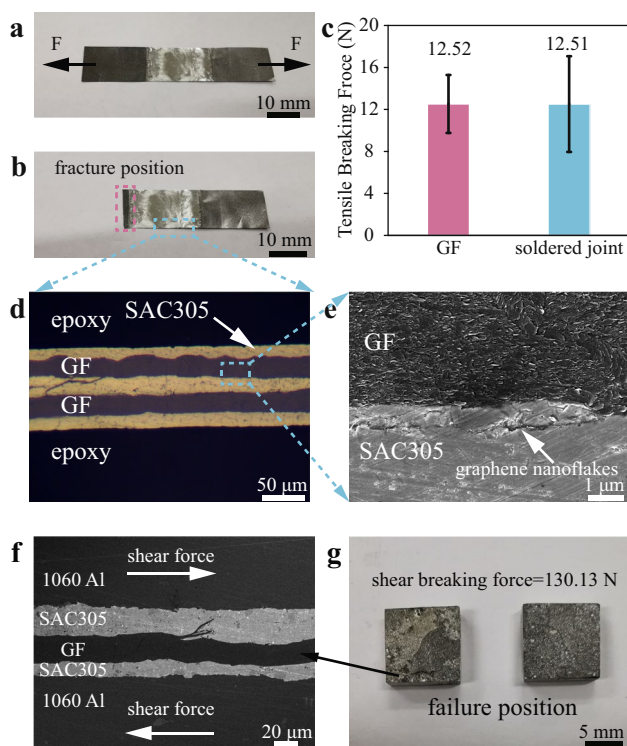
Mechanical performance tests. a Photograph of a typical GF-soldered joint. b Photograph of the failed GF-soldered joint after tensile test. c Comparisons of average tensile breaking force between GFs and GF-soldered joints. d, e Cross-sectional SEM images of the failed GF-soldered joint in b. f Cross-sectional SEM image of a typical Al-SAC305-GF-soldered joint. g Photograph of the failed Al-SAC305-GF-soldered joint after shear test
